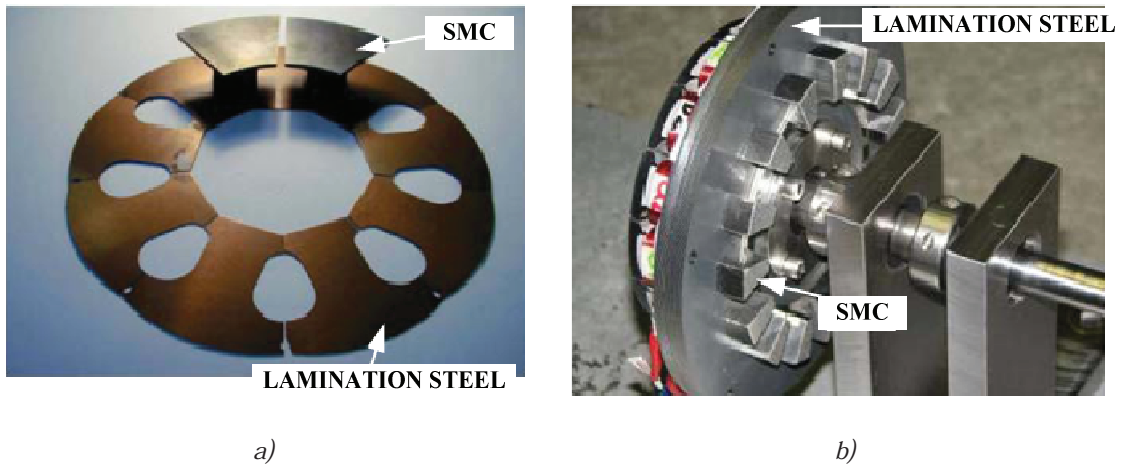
Axial machines with the stator constructed in SMC and lamination: a) 5kW machine [44] and b) 220 W machine [45]
